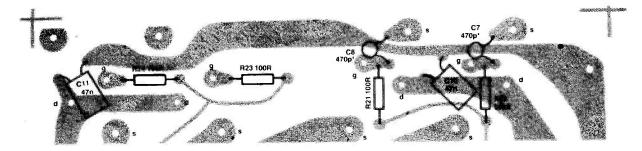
This overlay shows the components which are mounted directly on the copper side of the PCB.
